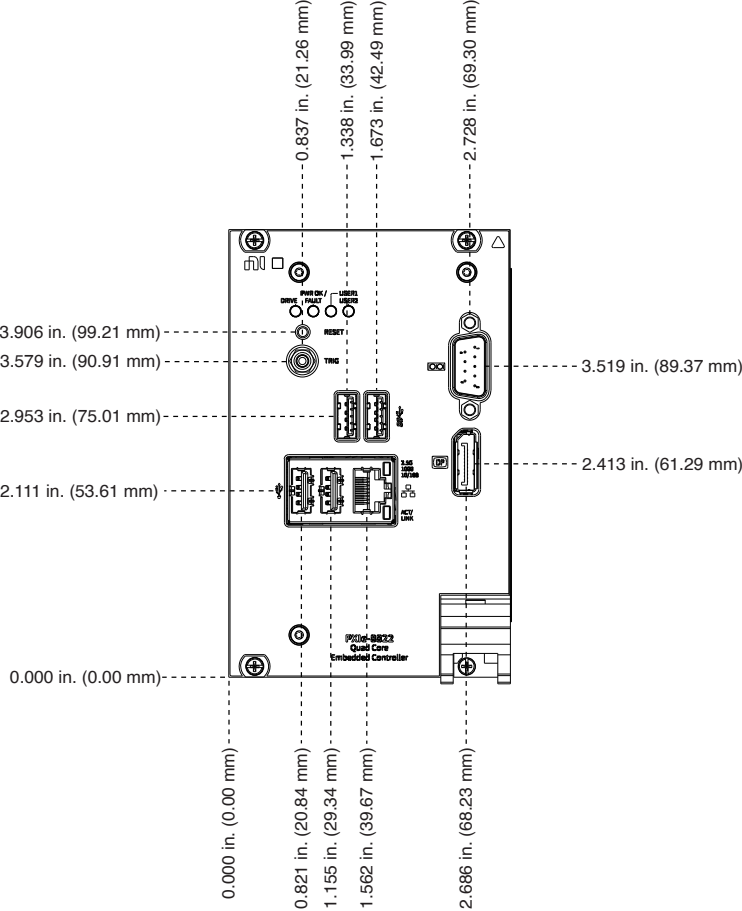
PXle-8842 Front Panel Layout and Dimensions
